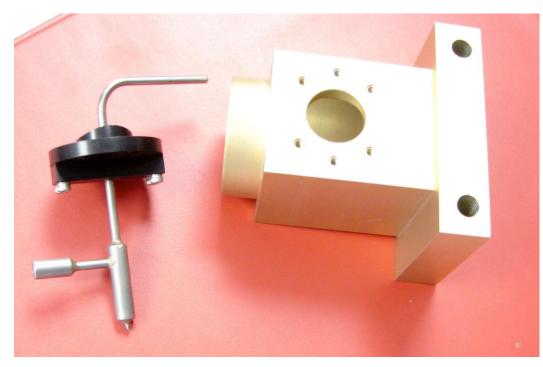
Removing the Pitot assembly (left) from the Pitot Block (right)
